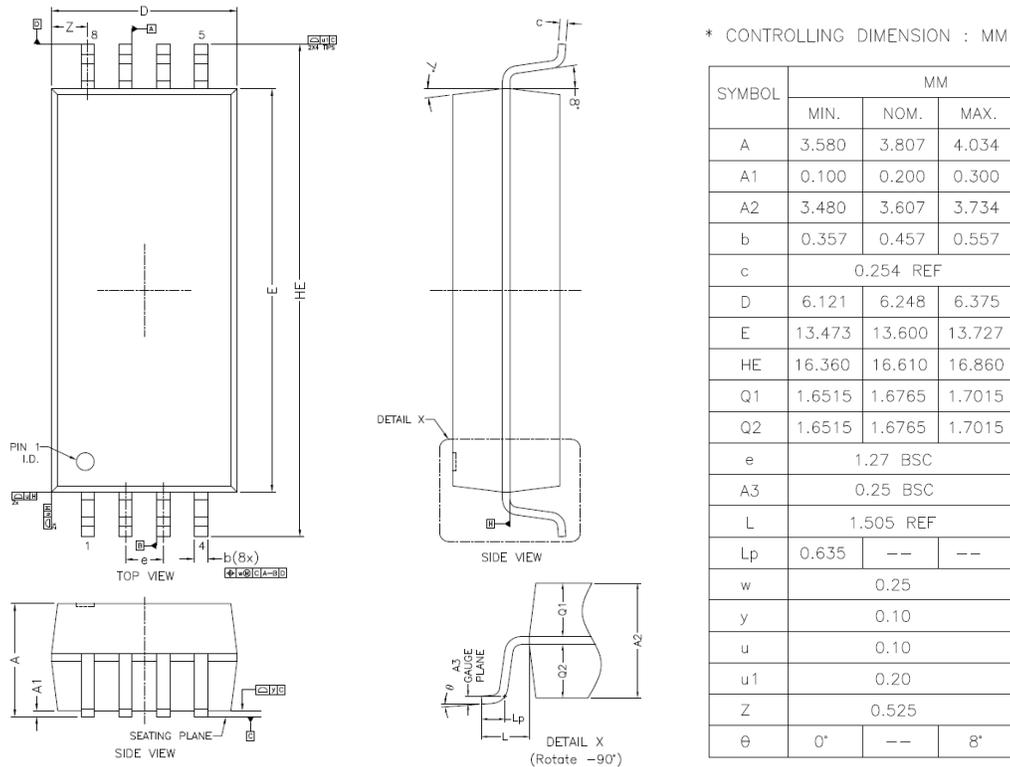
SOP8(600mil)/SOWW8 Package Shape and Dimension in millimeters
